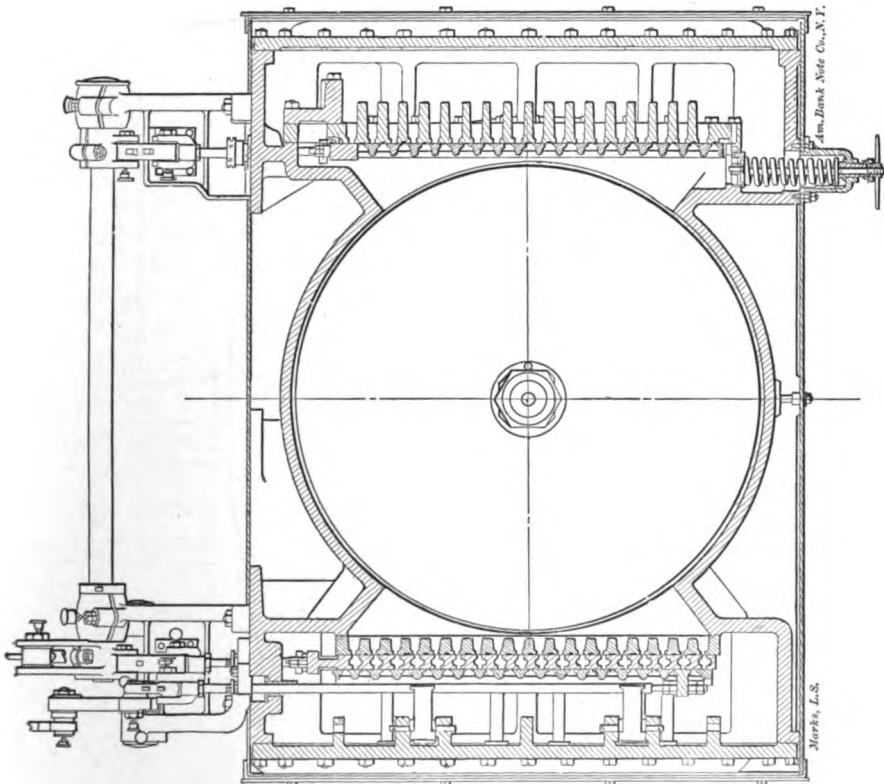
SECTIONAL PLAN OF L. P. CYLINDER.
